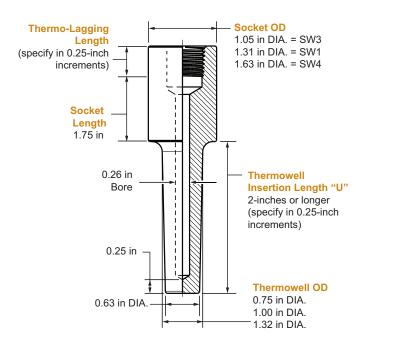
SW1, SW2 and SW3 Heavy Duty Tapered Stem - for weld in socket-welding fitting.
